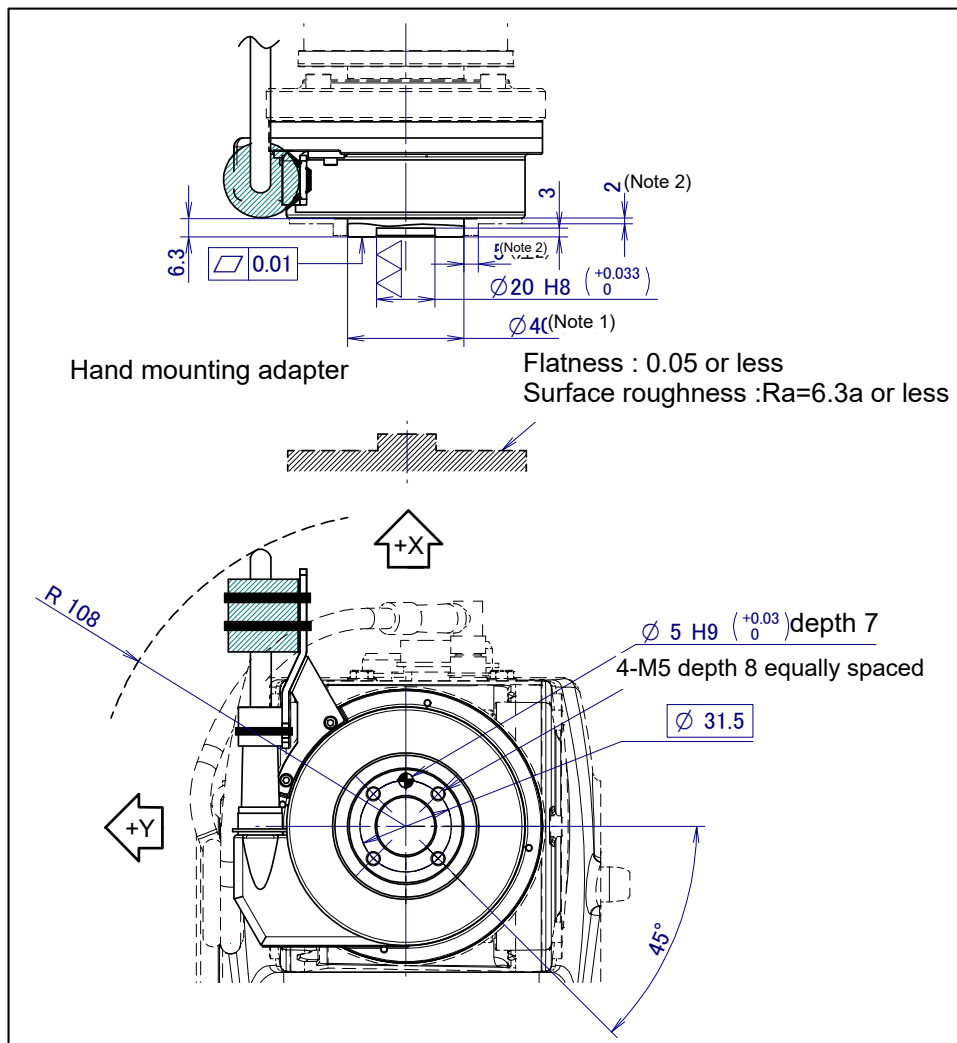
(a) Wrist section end effector mounting surface (FS-15iA)
